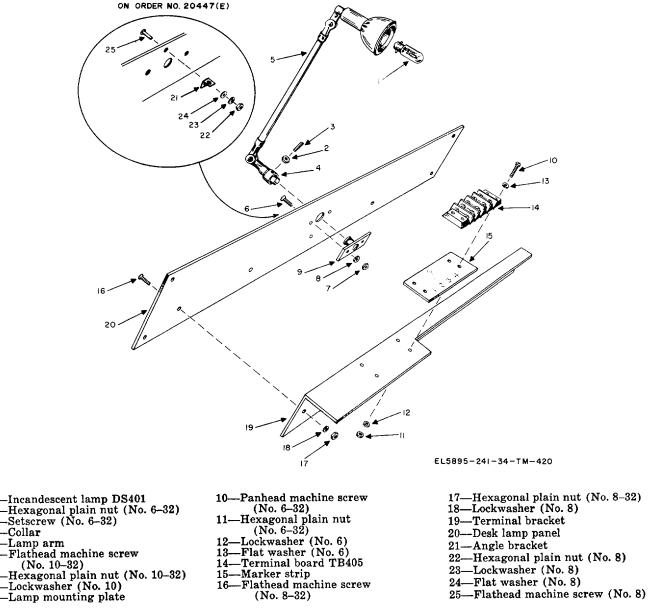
Desk lamp assembly (part of OA-2054/FSW-8 and OA-2054A/FSW-8), exploded view.
